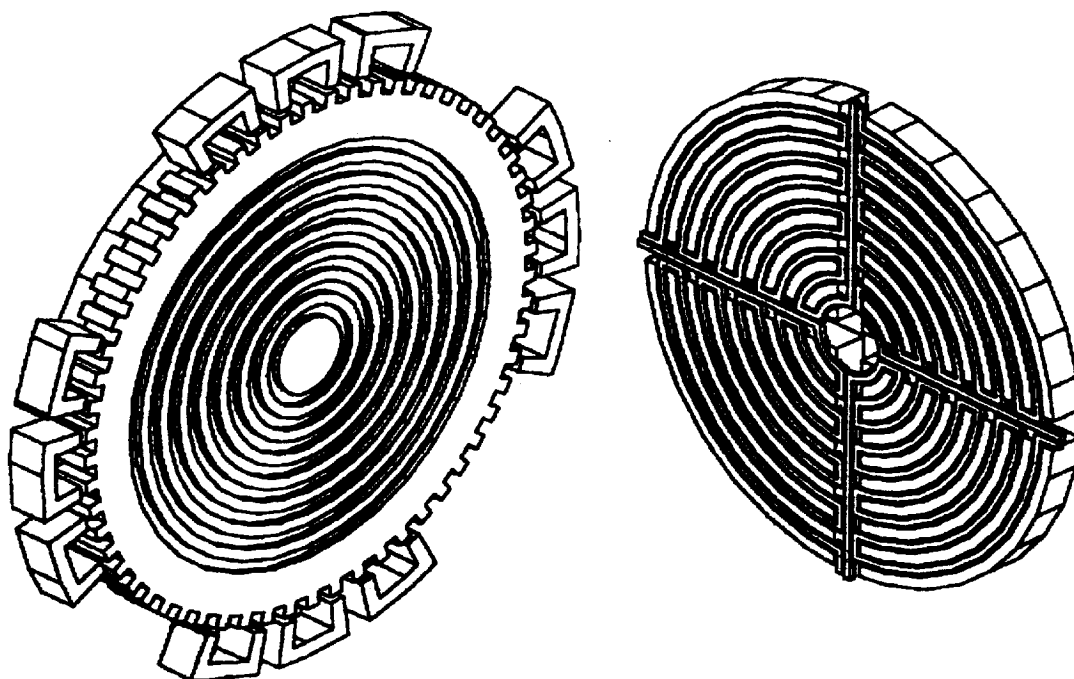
Magnetically suspended wheel and actuator configuration, exploded.
